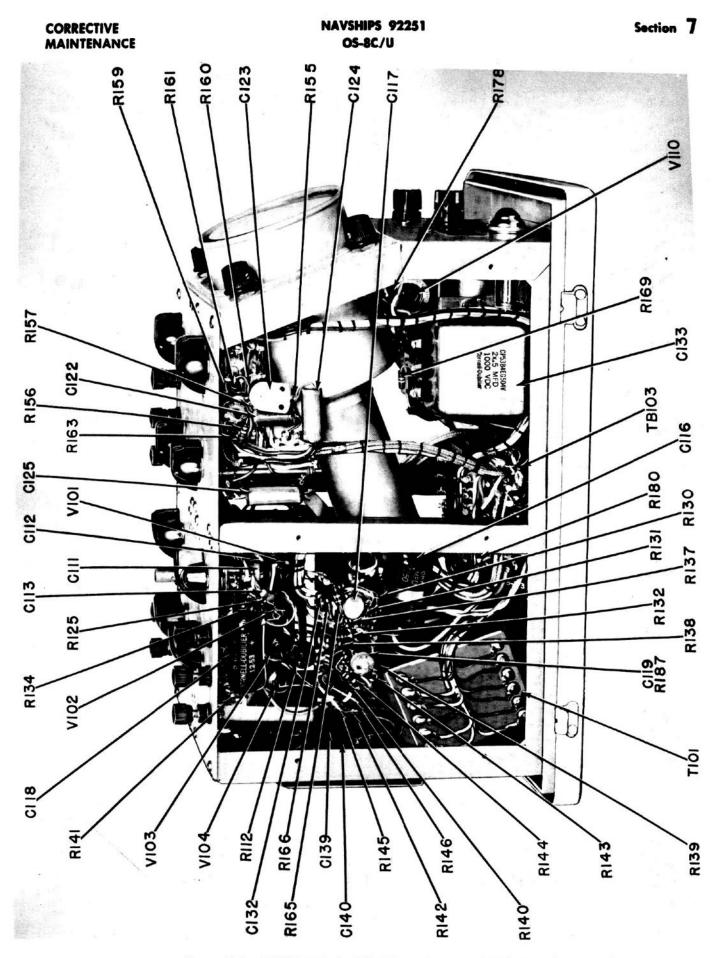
OS-8C/U,Left Side View, Cover and Side Panel Removed
